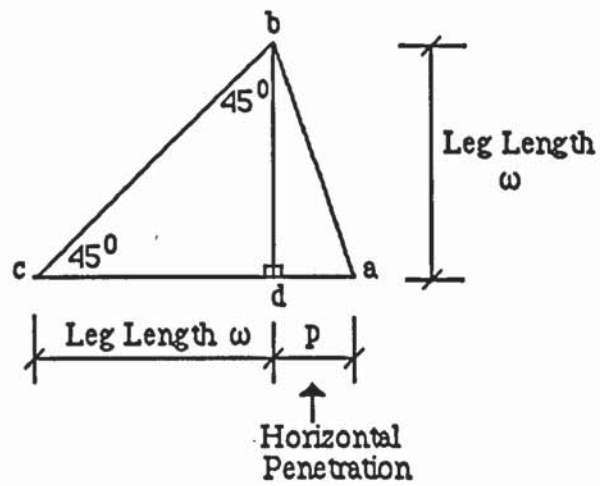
The proposed weld model for analysing tensile and shear fillet welds.
